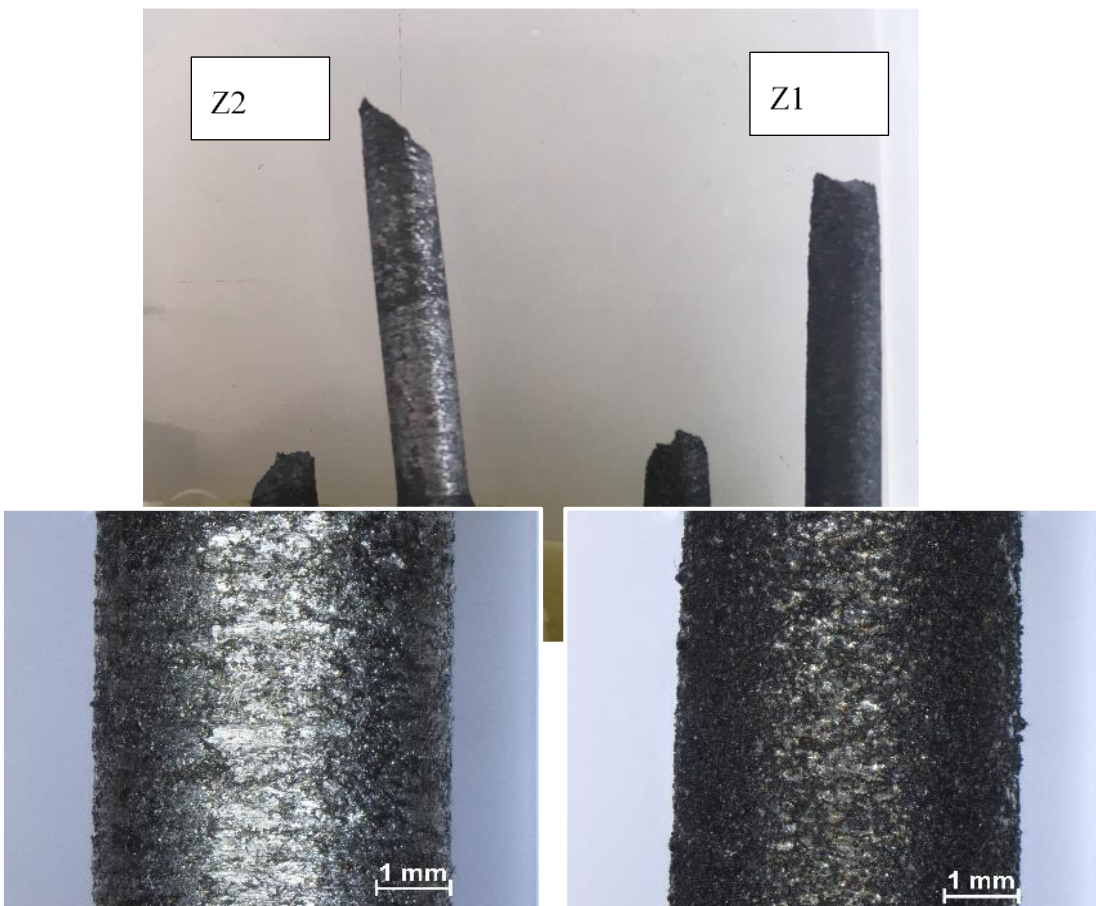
A) shows an image of an audition before the test and figure 103 – B) shows the test specimens after the tensile test. It should be noted that the specimen named Z2 has a surface partially machined to machine tools (see Figure 111).
